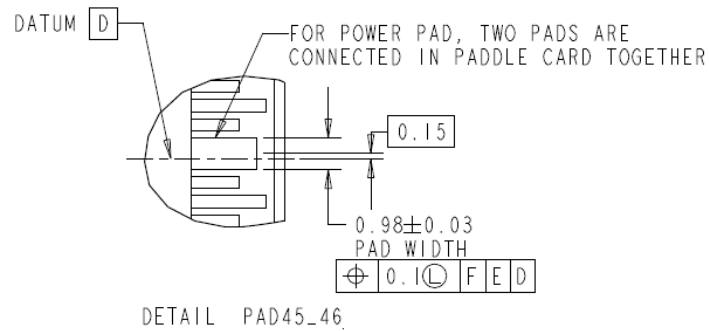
OSFP card-edge, detail of power pad (pads 45/46)
